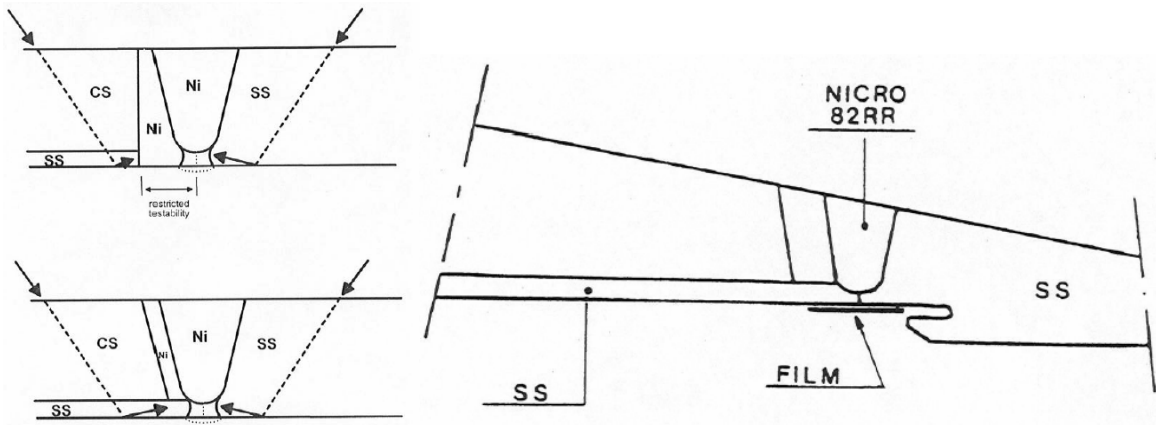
Ultrasonic and radiographic inspection procedure for a dissimilar metal weld in Germany (IAEA 2003).
